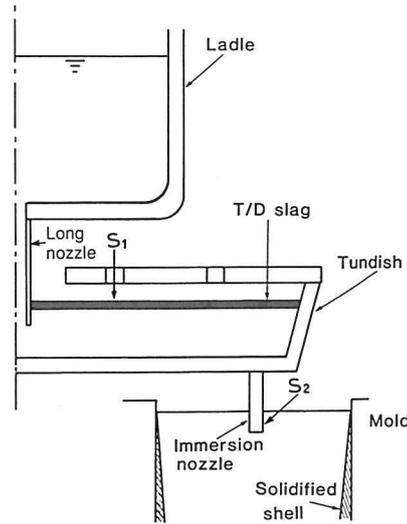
Schematic drawing of sampling position of slag and metal during casting.
